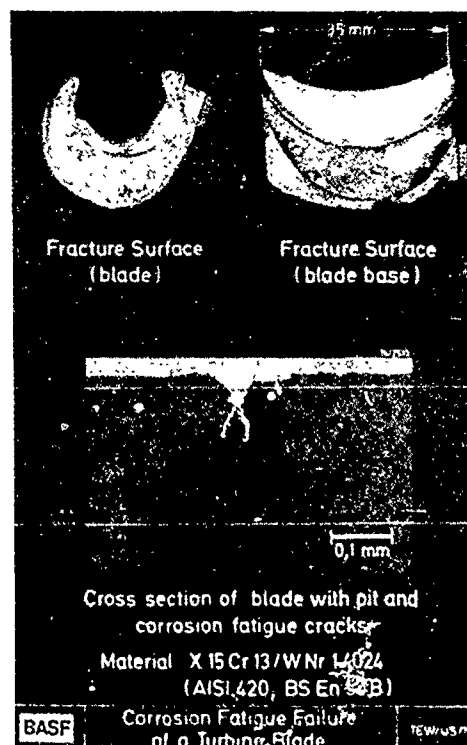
Fracture surface of blade, blade base, and cross section of blade with pit and corrosion fatigue cracks, respectively.
